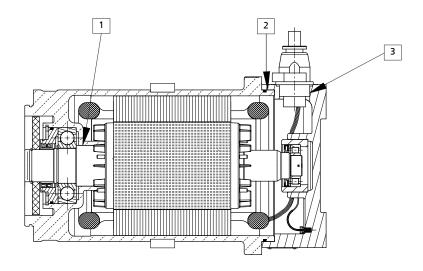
Flamepaths on explosion-proof motors – motor types DKM161 / MA16
